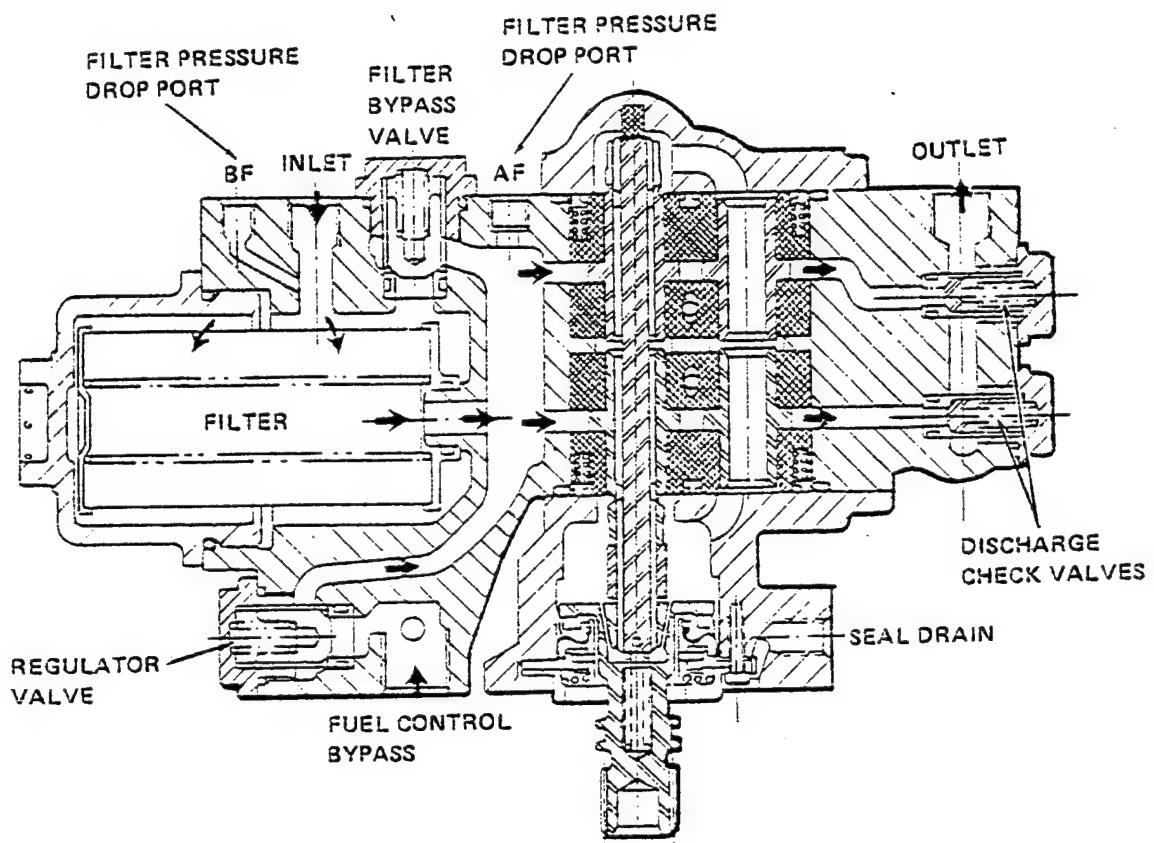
T63-A-700 Fuel Pump and Filter Assembly.
